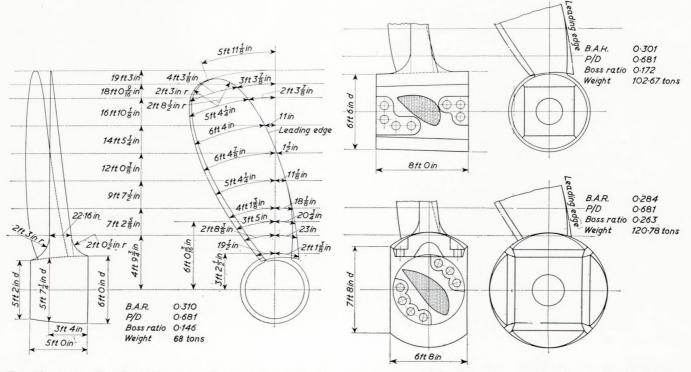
One million dwt tanker centre line propeller, triple screw arrangement. Solid and built-up propellers designed for 31 600 shp at 60 rev/min. Material—Nikalium. Scale—1:100
